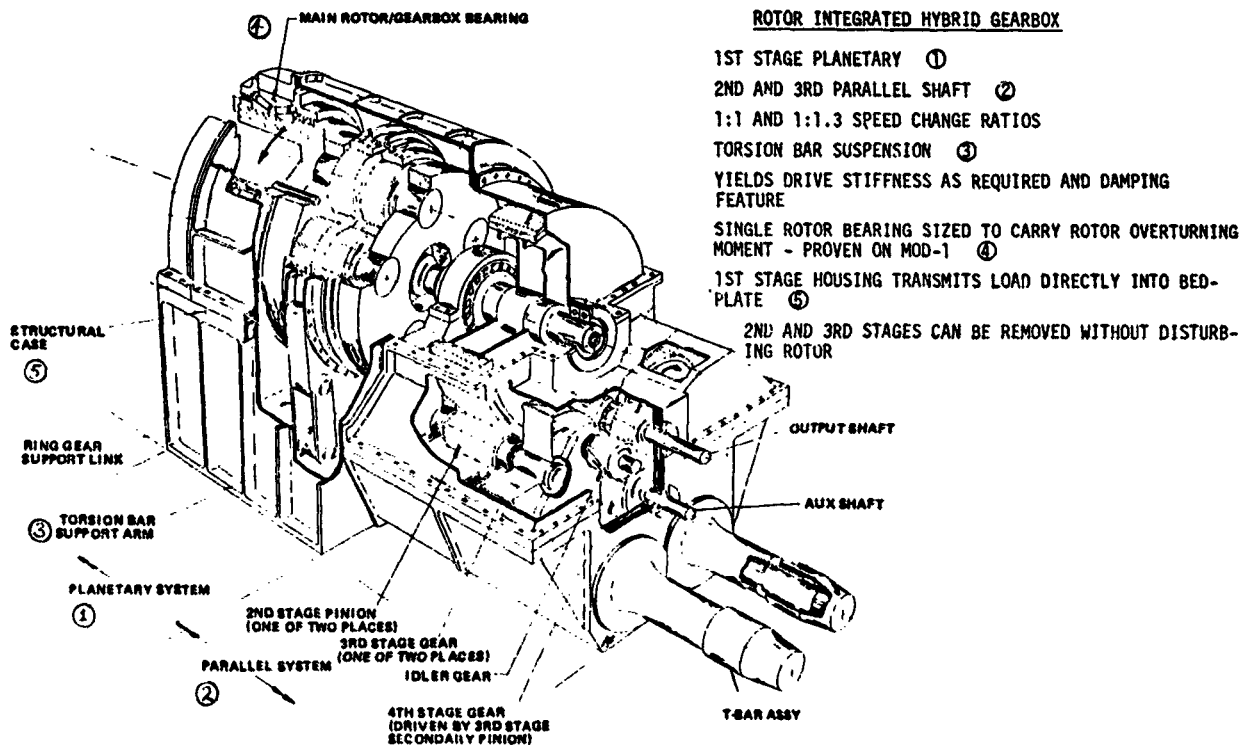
ROTOR INTEGRATED HYBRID GEARBOX
